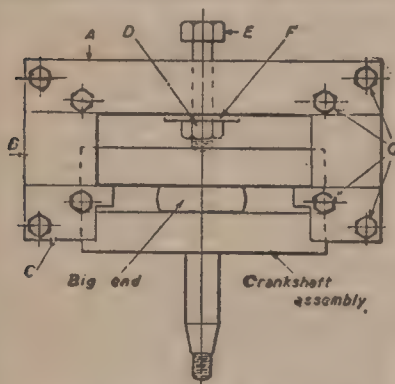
Easily made special cramp for dismantling the crankshaft assembly.
